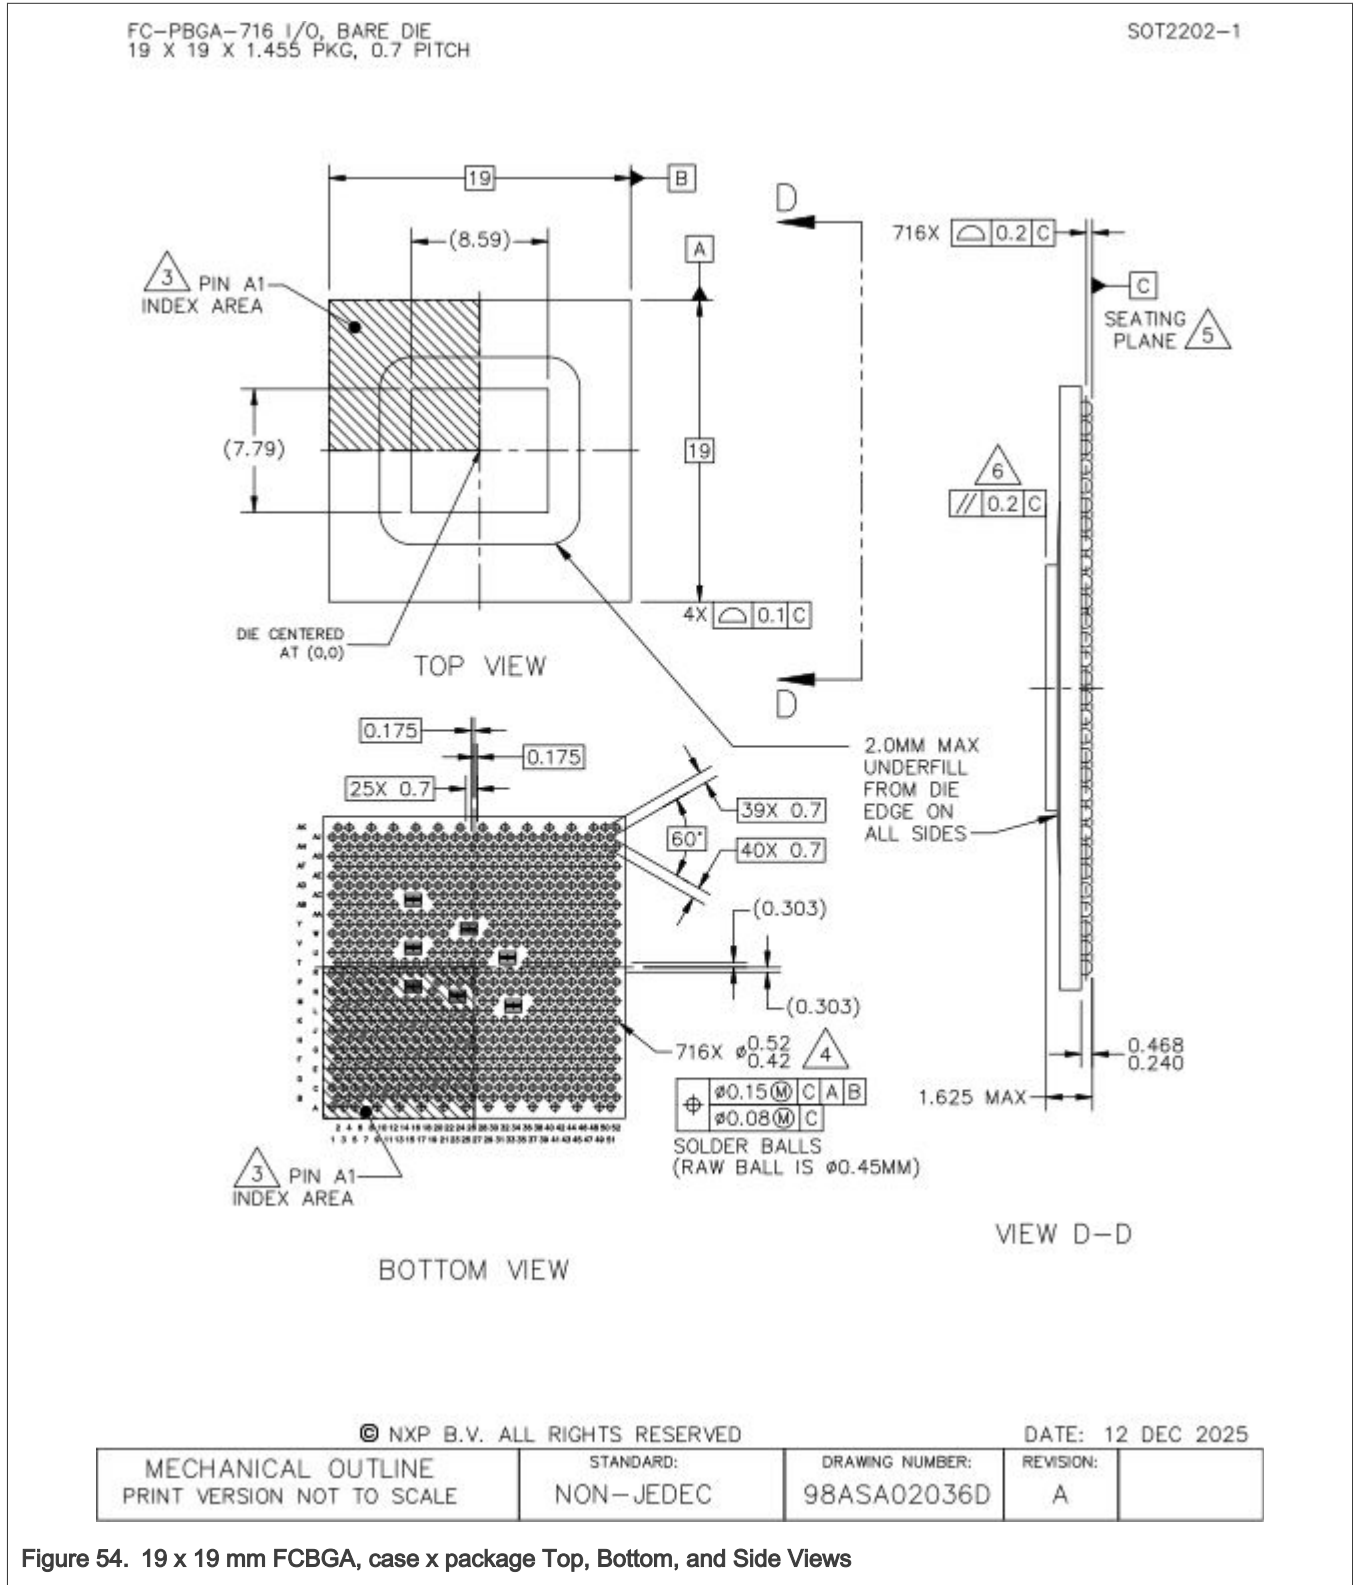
19 x 19 mm FCBGA, case x package Top, Bottom, and Side Views
